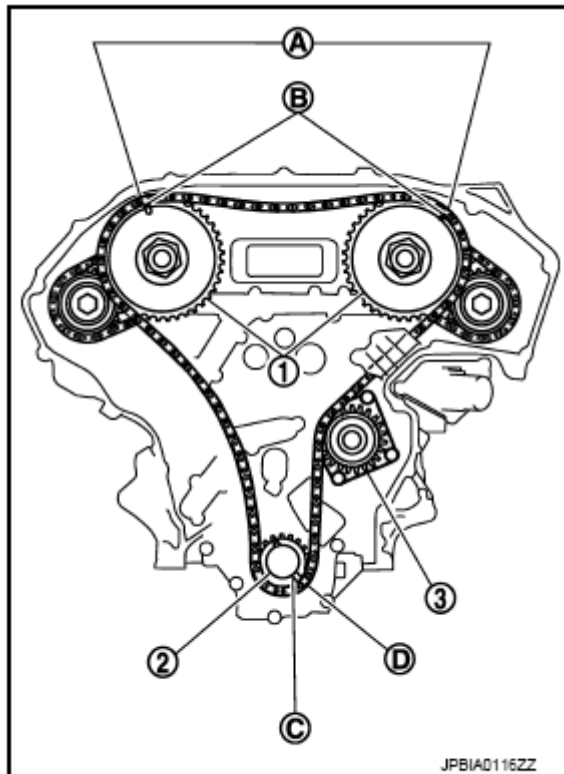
Locating Matching Mark On Crankshaft Sprocket
